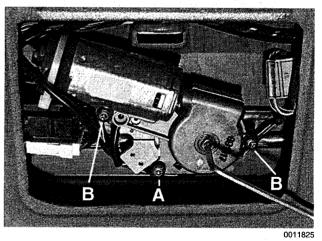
Sunroof motor mounting screws (A and B). Screw at A is longer than screws at B.
